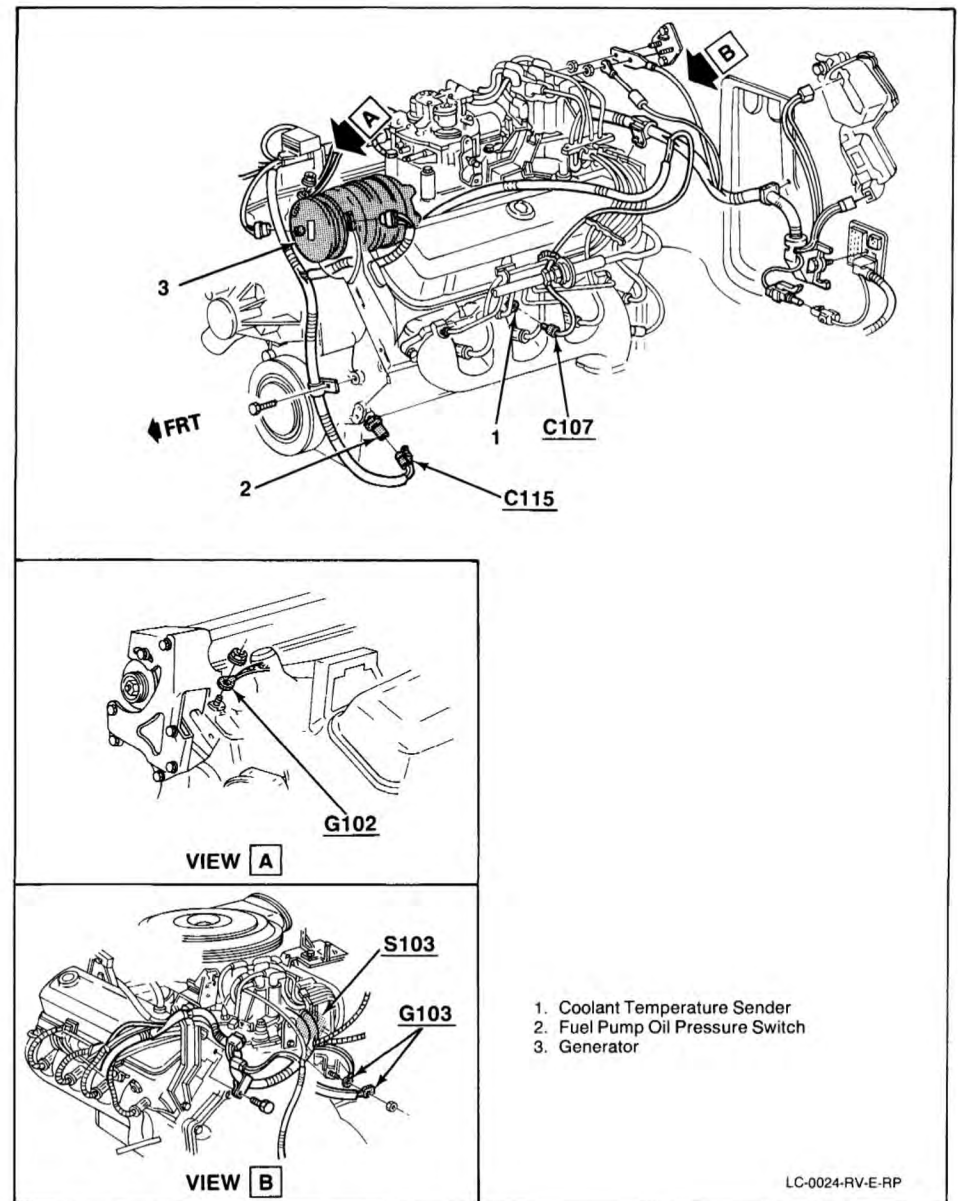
Engine Wiring, Rear Left Side — RPO L19 (Fleetside)
